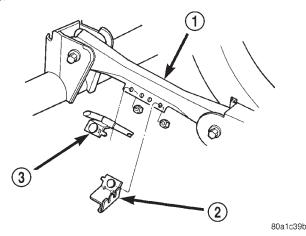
Parking Brake Cable/Bracket And Wiring Bracket
